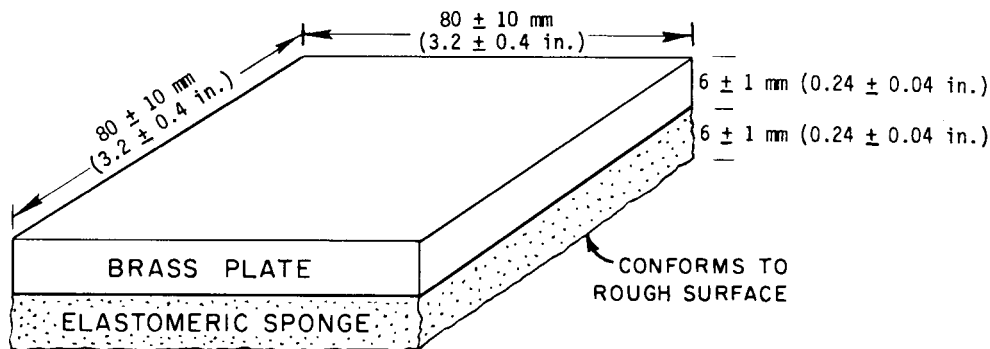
Contact Pad for Leveling on Rough Surface Specimens
